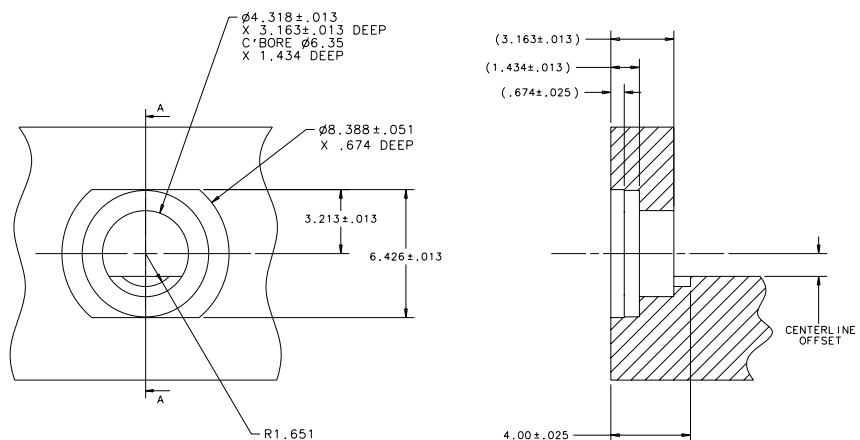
Machining Dimensions for V115FMS75 Mounting Hole
